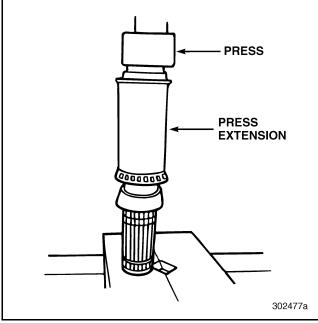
Pressing Bearing onto Output Shaft (T313L21/T318L21 Shown)
